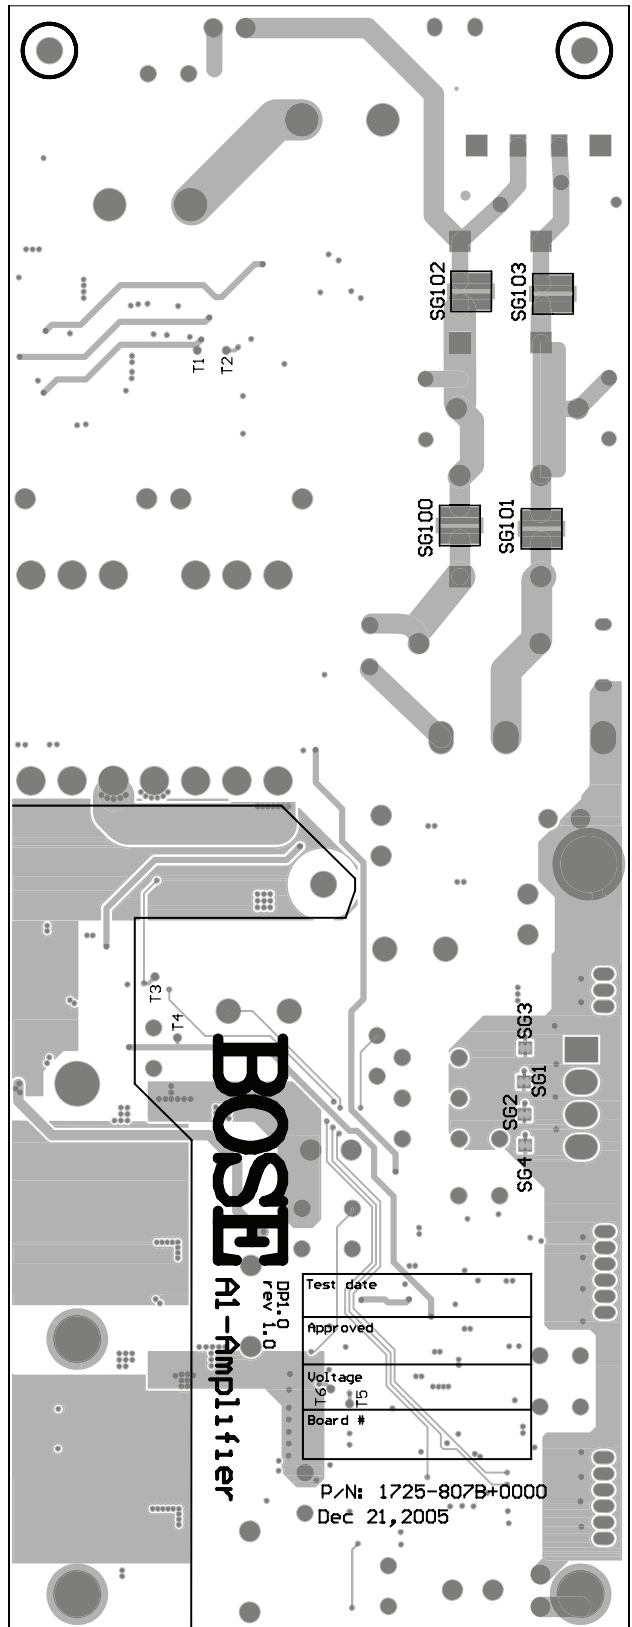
Amplifier/SMPS PCB Bottom Etch Layout
